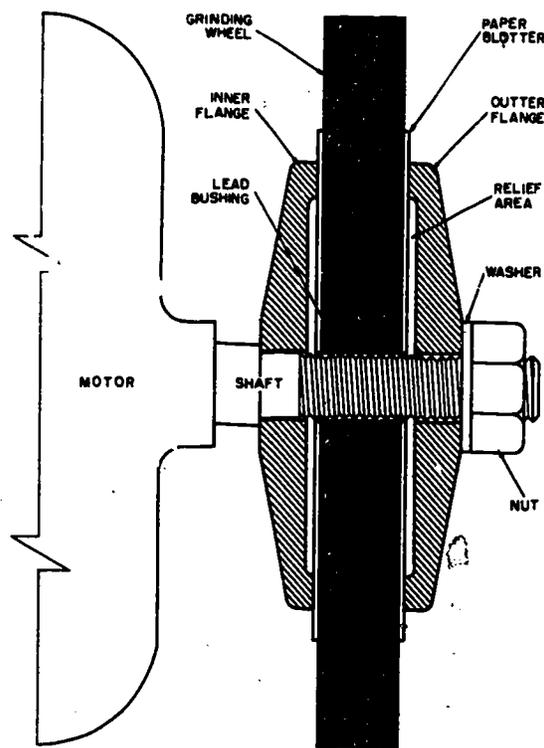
Grinding wheel for bench and pedestal grinders.
